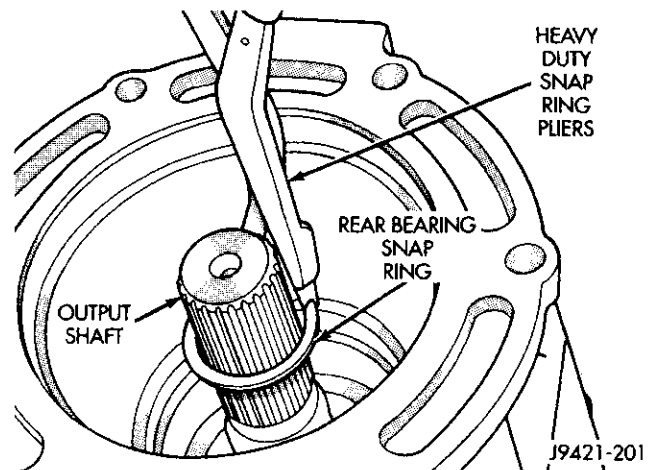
Installing Rear Bearing Snap Ring—4WD
